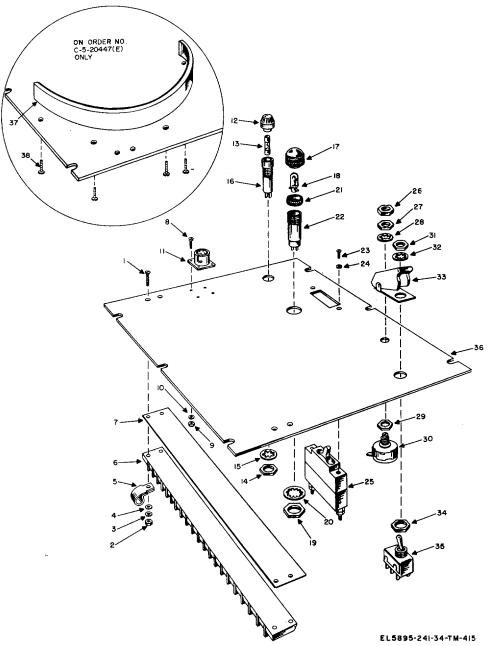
Miscellaneous control panel (part of OA-O21/4FSW-8 and OA-014A/ exploded view-Continued
